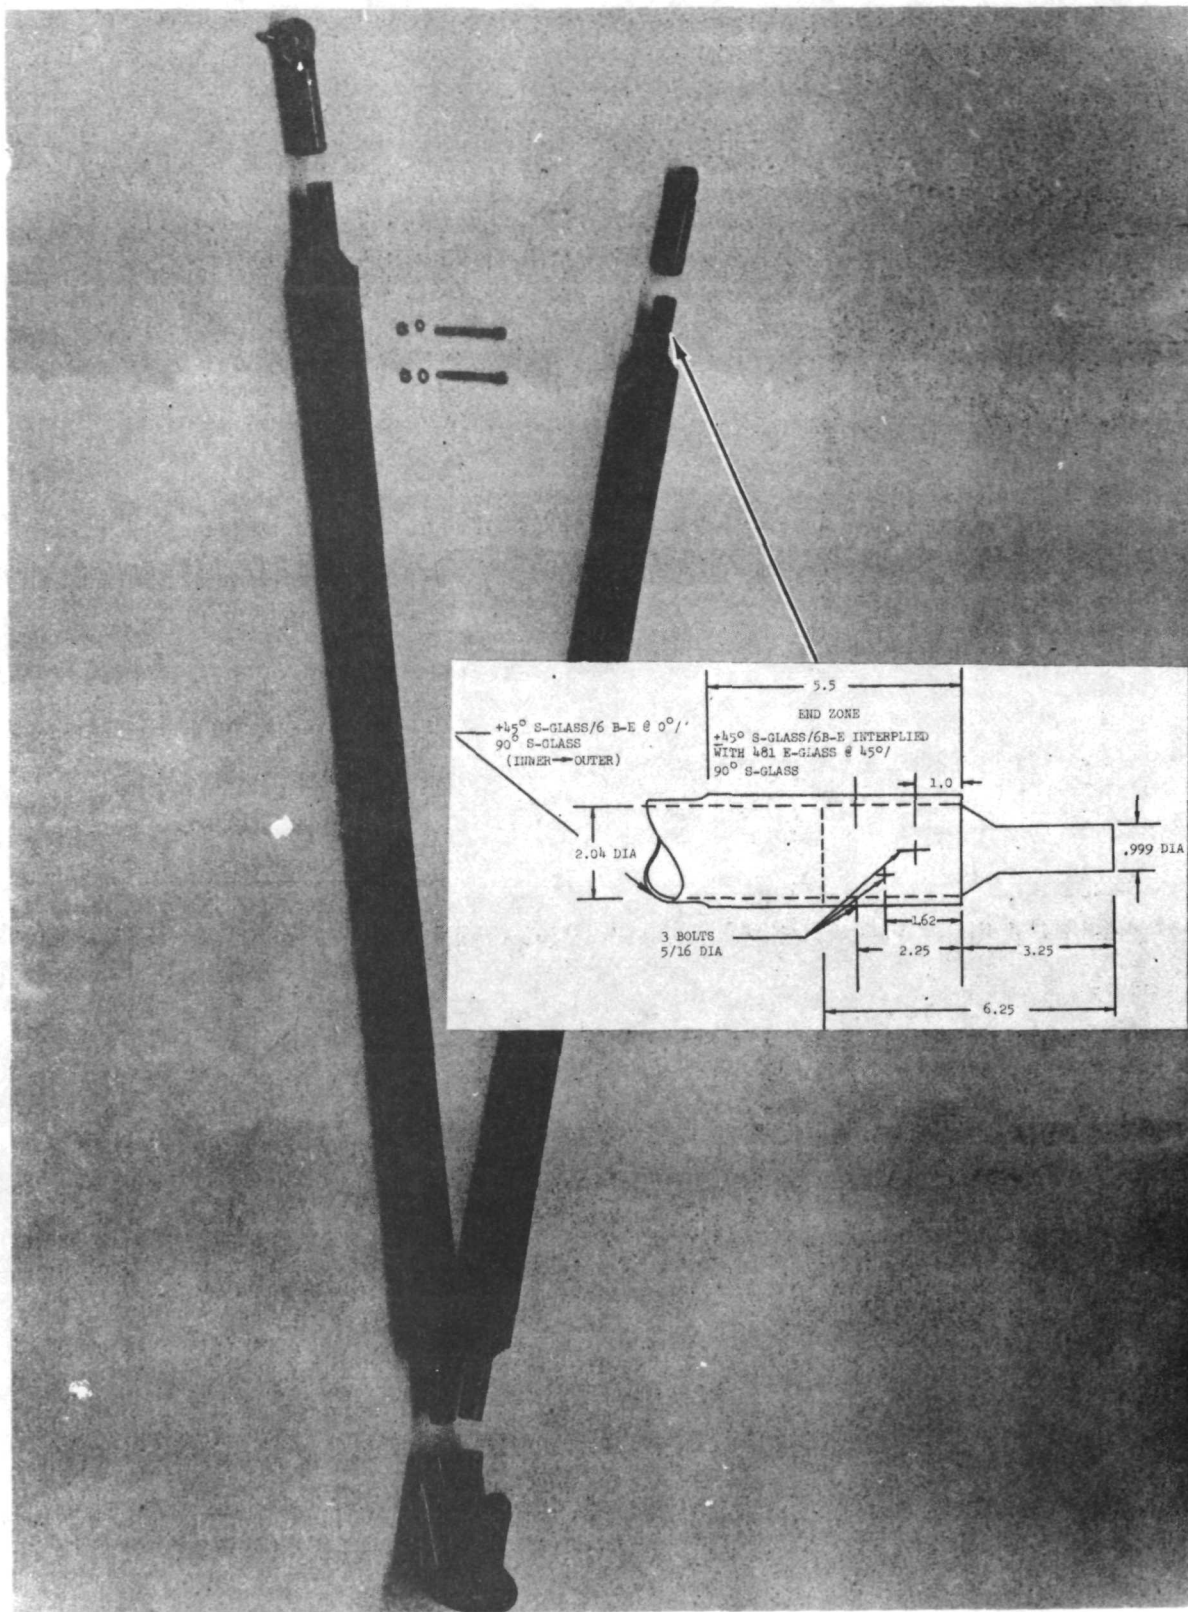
BORON/EPOXY SKID GEAR COMPONENTS
